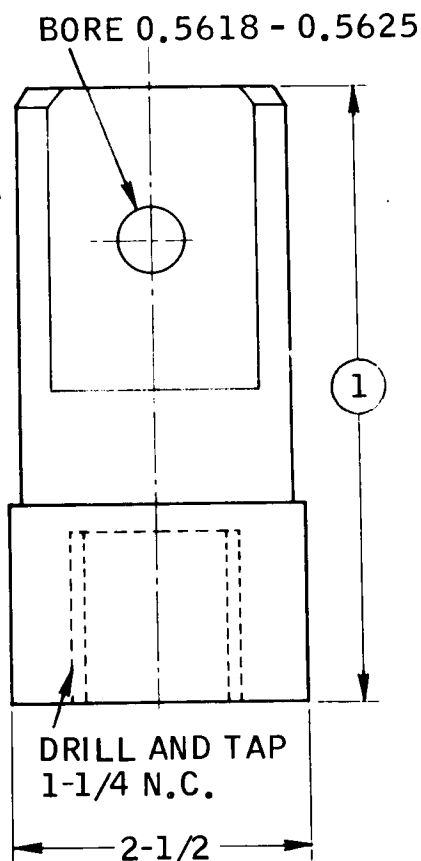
Specimen Grip Assembly - Bell Crank Attachment (Schematic)
